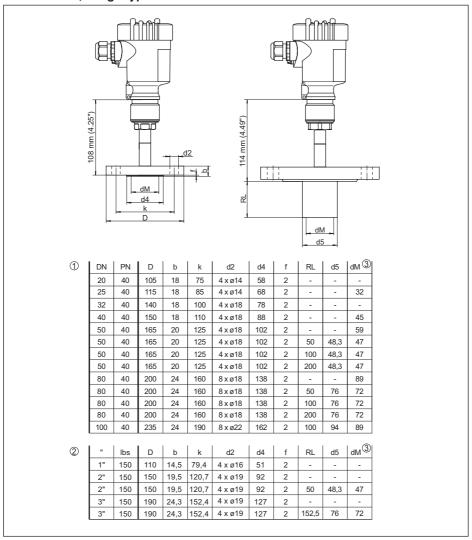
VEGABAR 51, flange version, dimensions in mm
